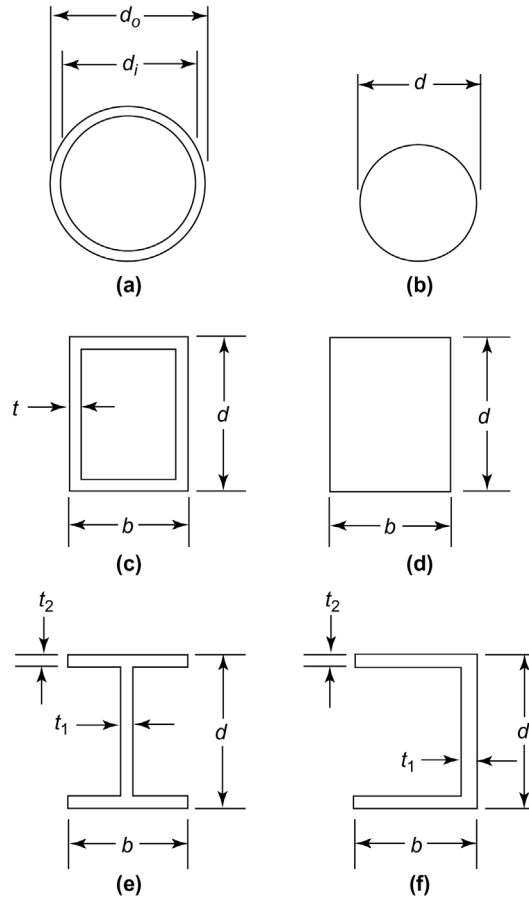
Bar cross-sectional shapes. (a) Circular tube; (b) solid circular; (c) rectangular tube; (d) solid rectangular; (e) I-section; (f) channel section.
